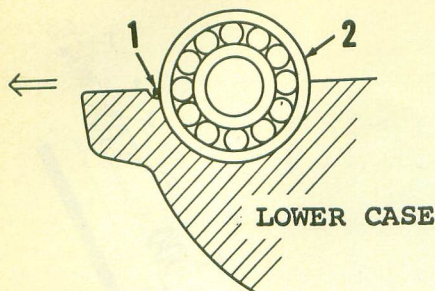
Crankshaft ball bearings have guide pins (1) that should be placed in recess in the lower crankcase half.
